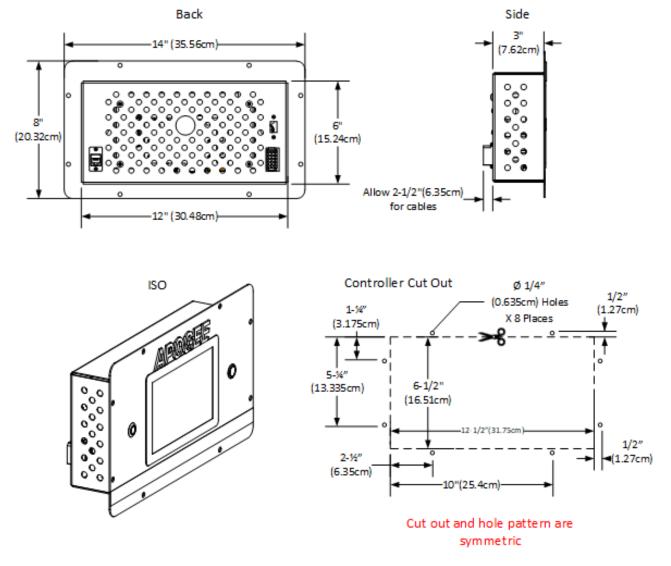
Cee® Apogee® Flange Controller Cut Sheet
